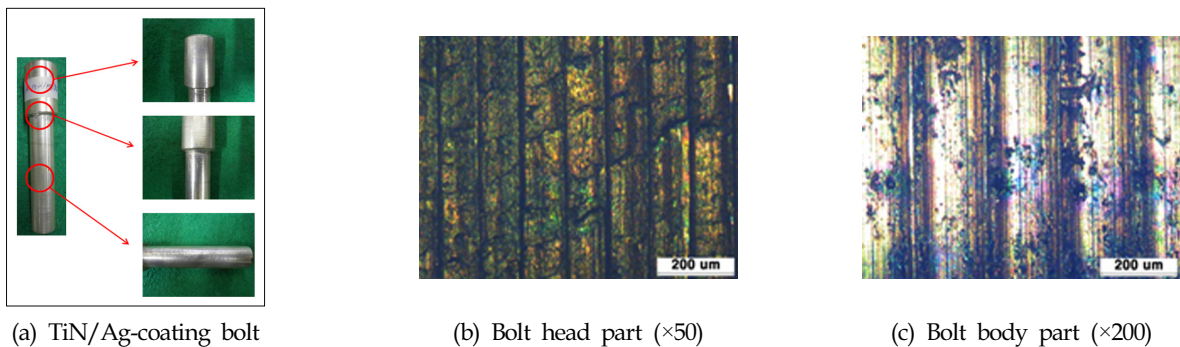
TiN/Ag-coating bolt after corrosion rate testing
